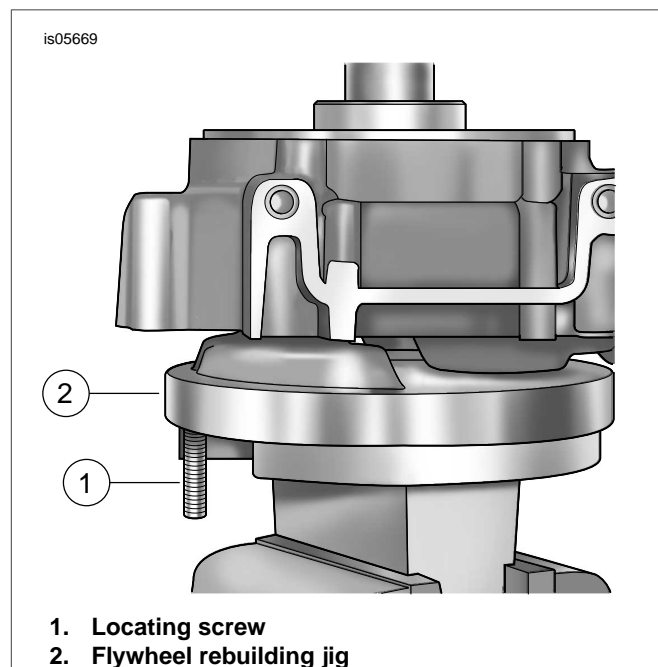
Place Locating Screw in Balancing Hole to Prevent Rotation
